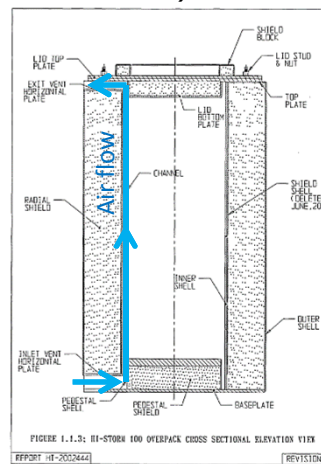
10-STORY 100 OVERPACK CROSS SECTIONAL ELEVATION VIEW
